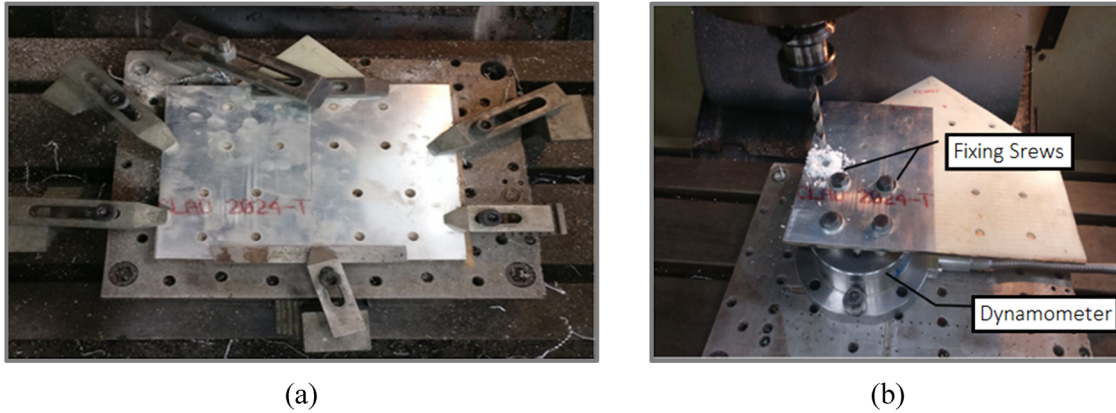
(a) Drill holes for fixing the hybrid composite plate and (b) experimental setup.
